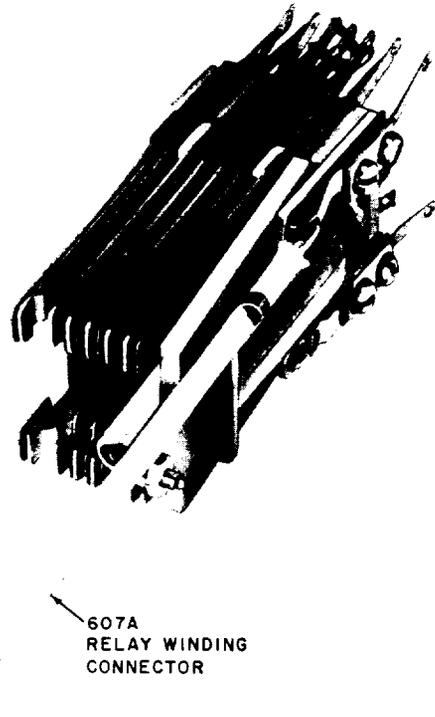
Connecting to Winding Terminal of a U-Type Relay
